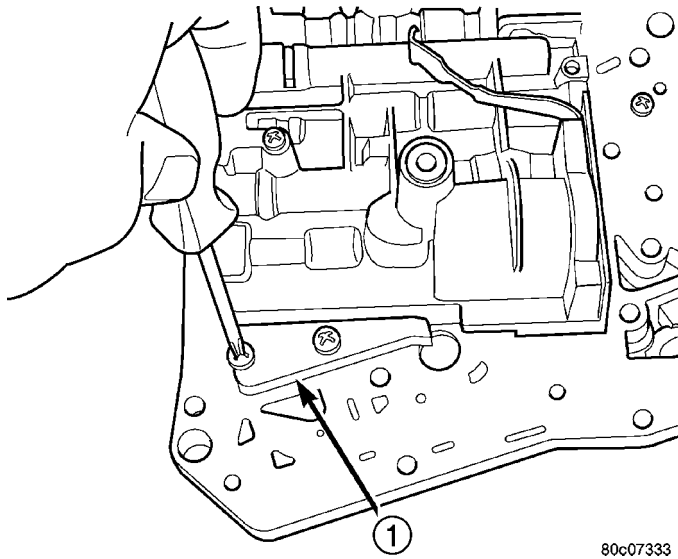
Install Transfer Plate-to-Valve Body Screws
